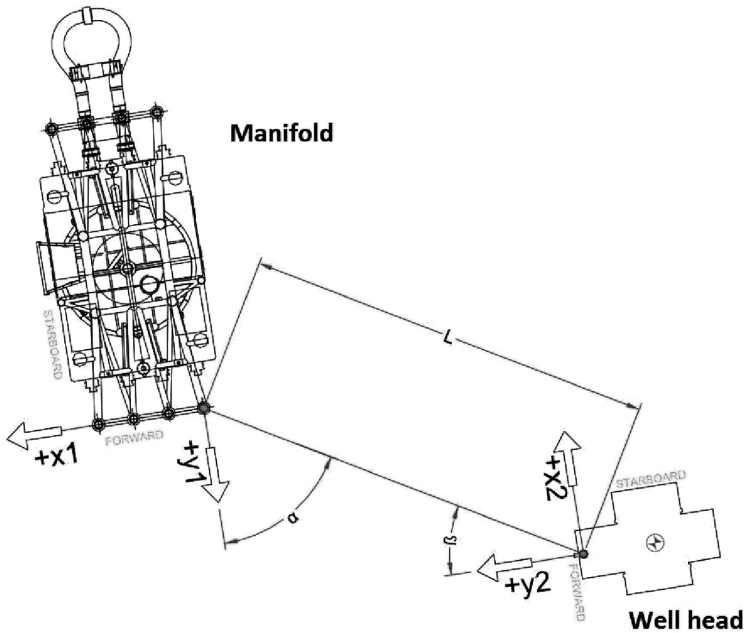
Spoolpiece metrology figures to be reported for spoolpiece design [5]
